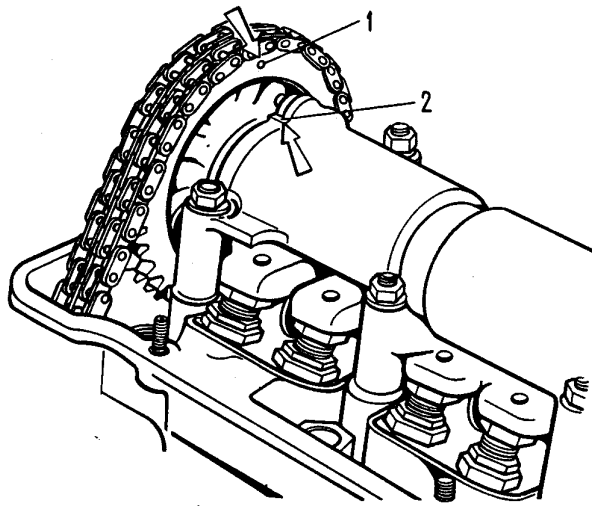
Alignment of Timing Marks on Camshaft Sprocket and on Bearing Housing:
